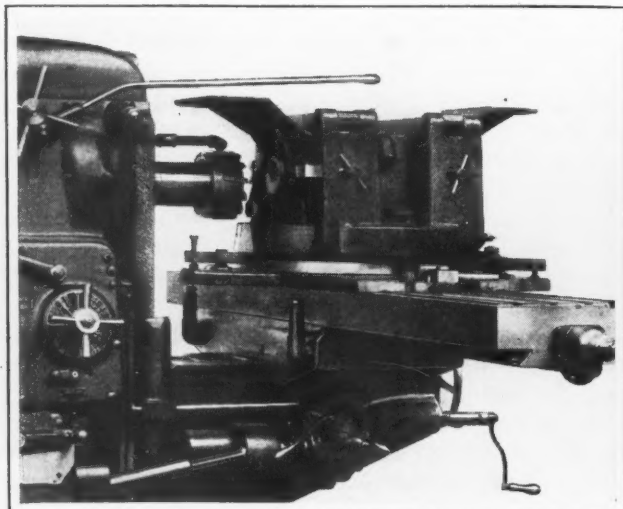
An Indexing Fixture which Facilitates Milling Both Ends of the Housing
